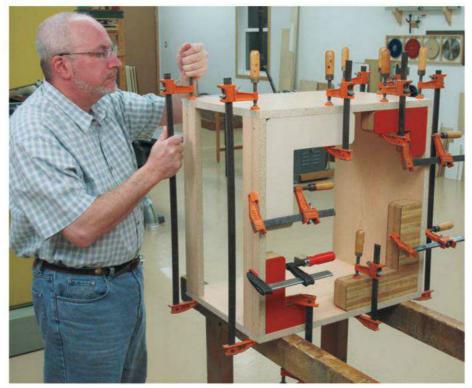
Assemble the carcass in two stages. First glue, biscuit, and clamp the bottom (piece 2) and stretchers (pieces 4) to one of the sides (piece 3).
